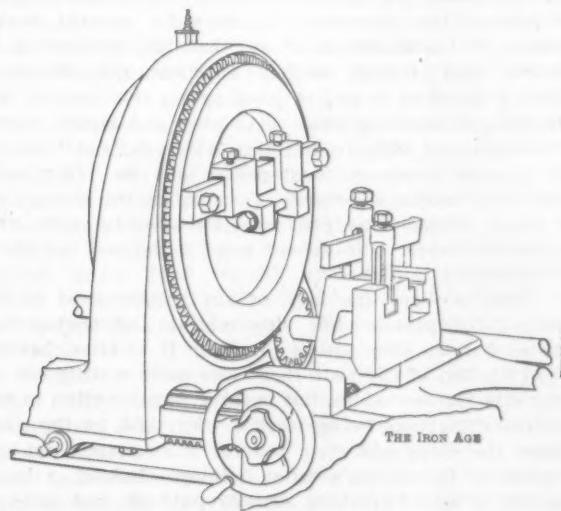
Center Driving Mechanism, Showing Sliding Jaws Used in Clamping Work.
